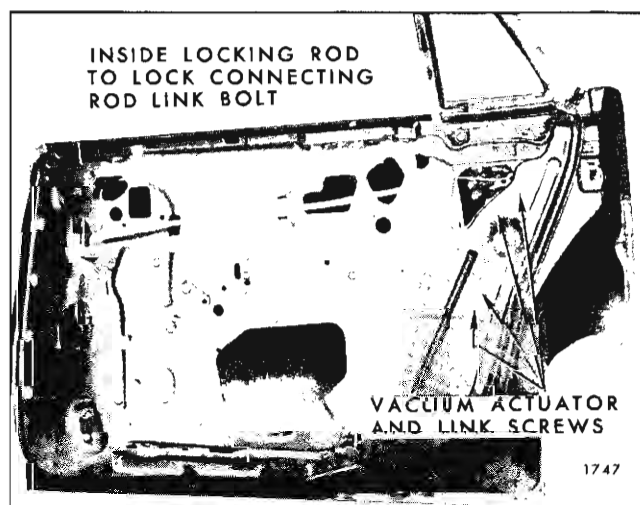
D81—Vacuum Lock Actuator, and Link Assembly Removal
